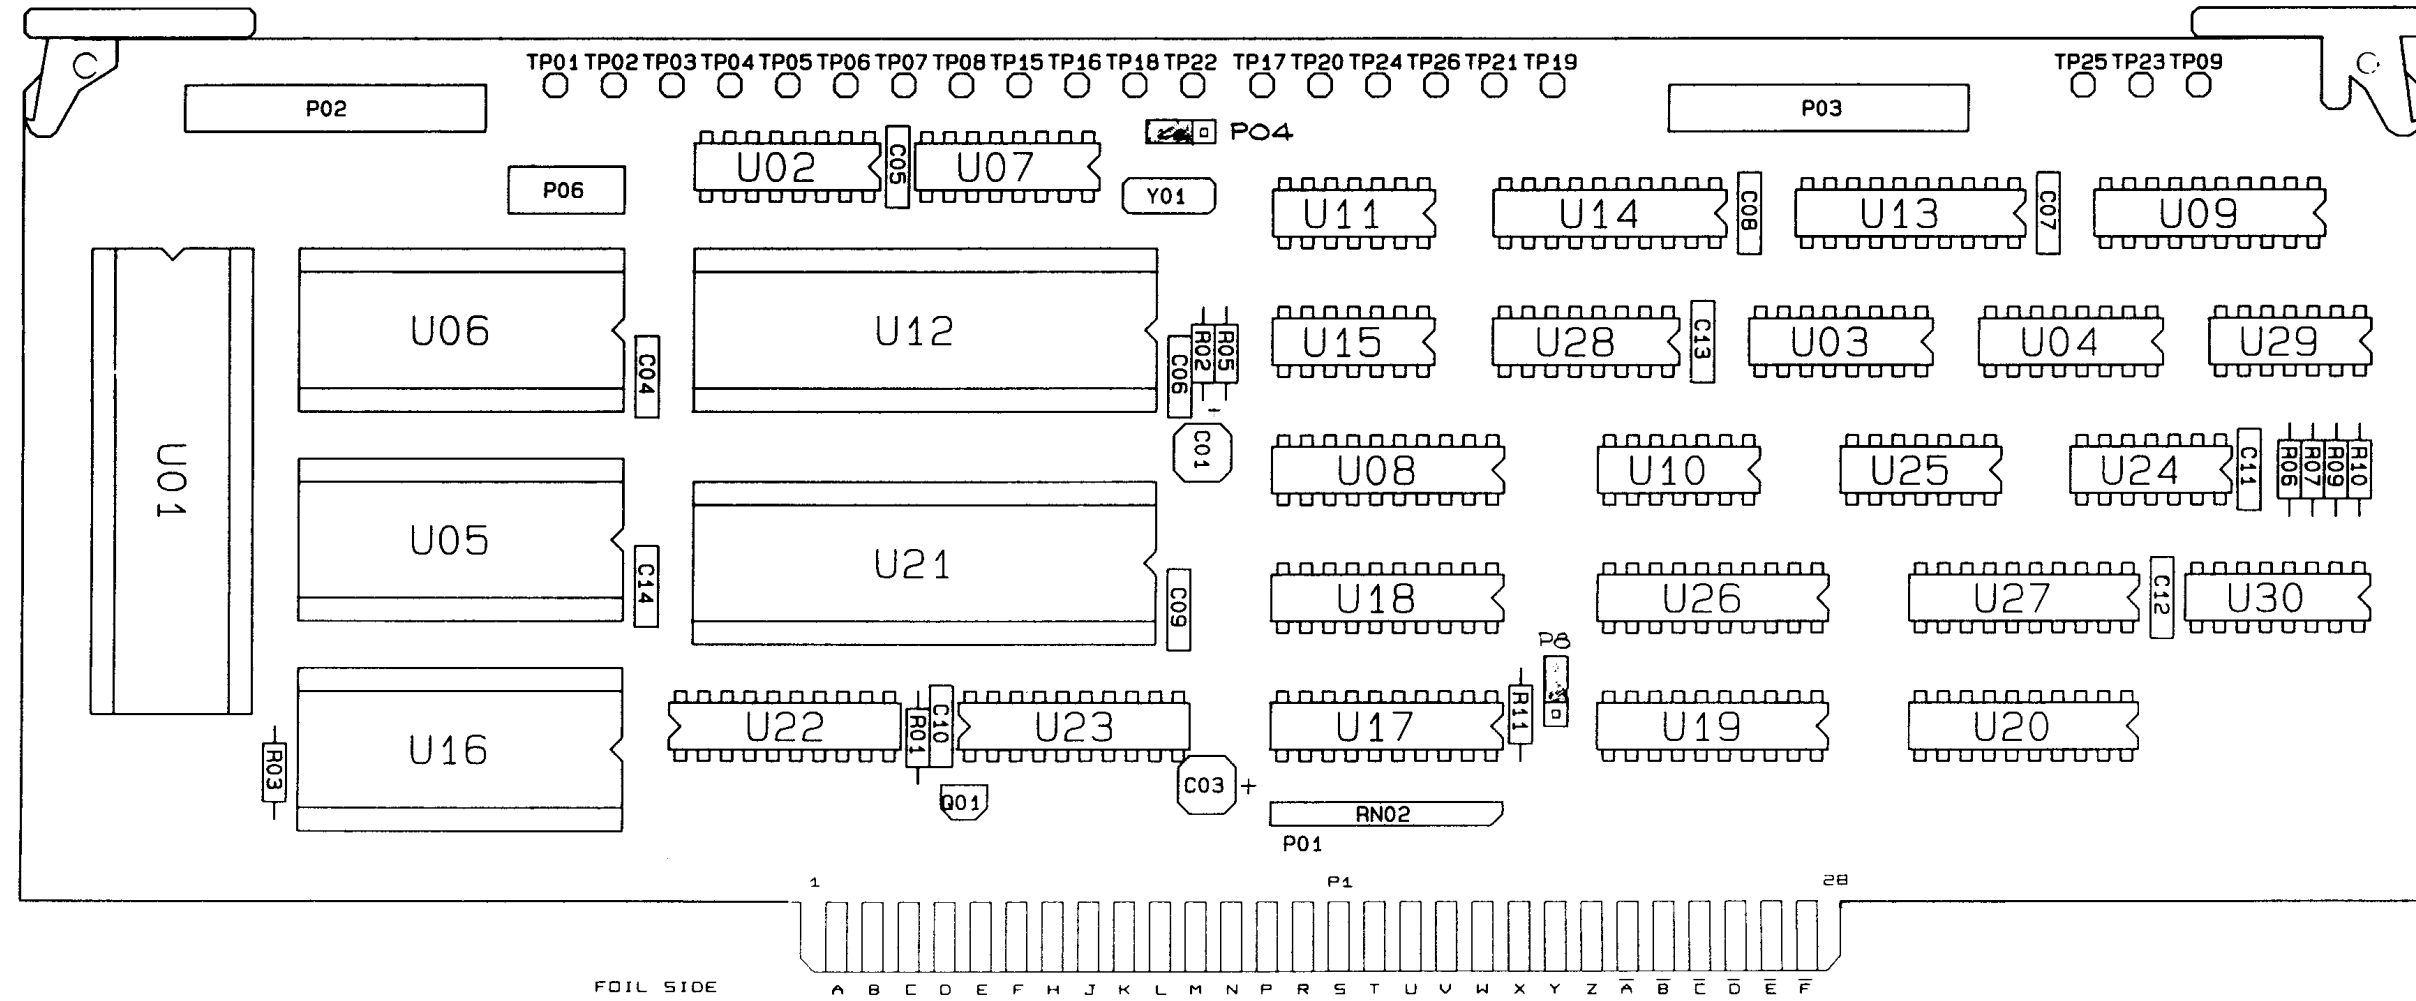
A1A1 GPIB PCB Parts Locator, Assy D32101-3
